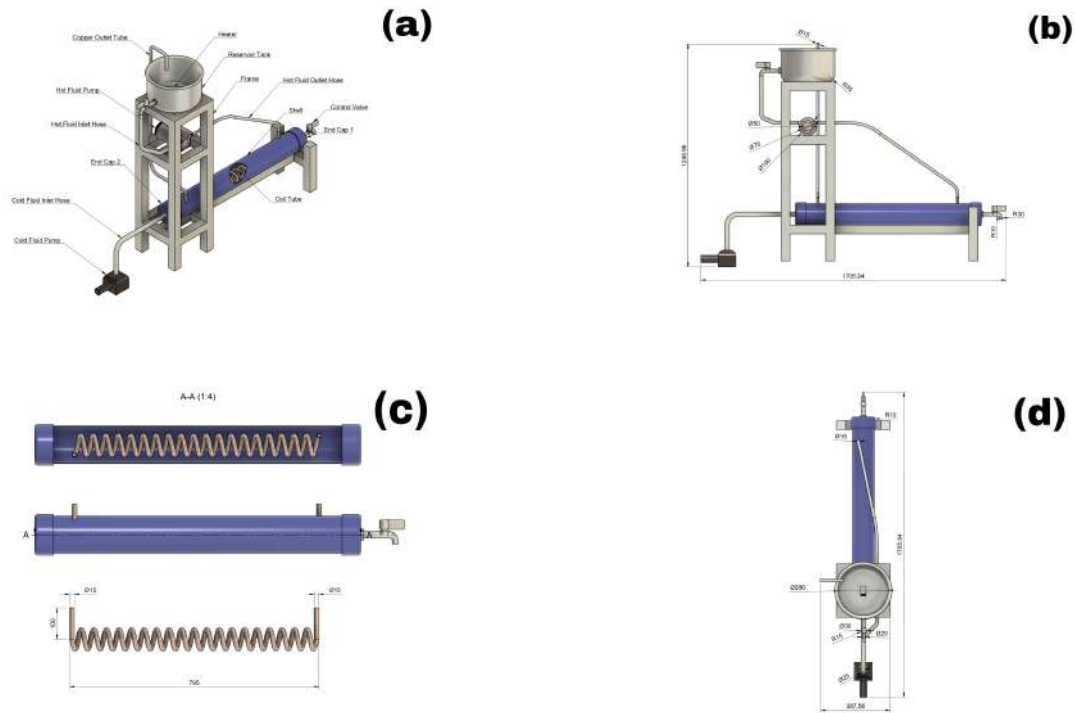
Dimensions and configuration of prototype heat exchanger using DFMA : (a) front view, (b) side view, (c) shell, (d) top view
